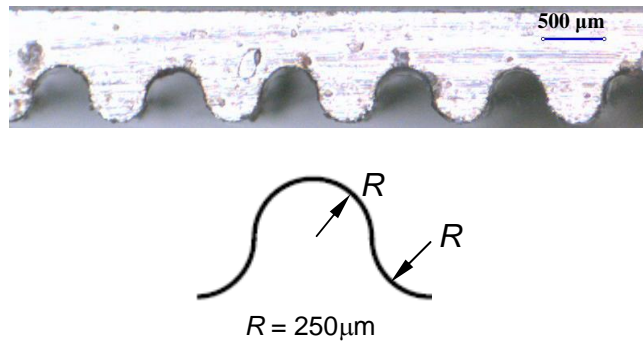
Stainless-steel embossing mold with protruded micro-grooves of 500 μm .
